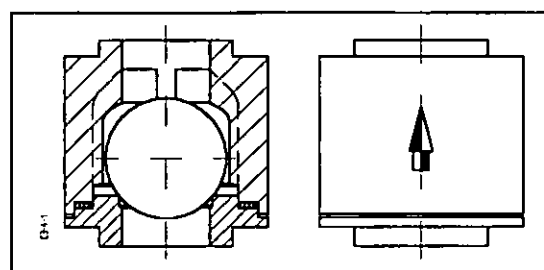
Single Ball Valve - Sectional and Plan View
